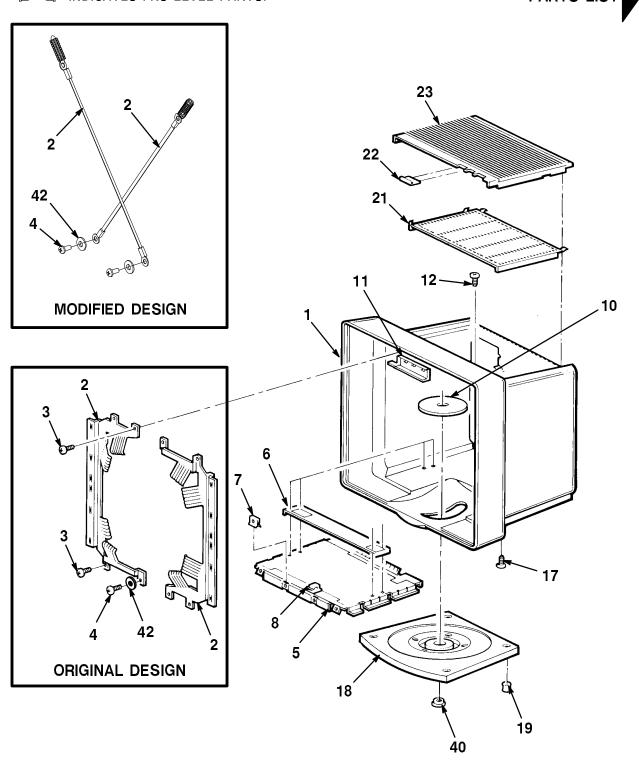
A. CRT/Chassis Assembly, VR320 (Sheet 2 of 2)
